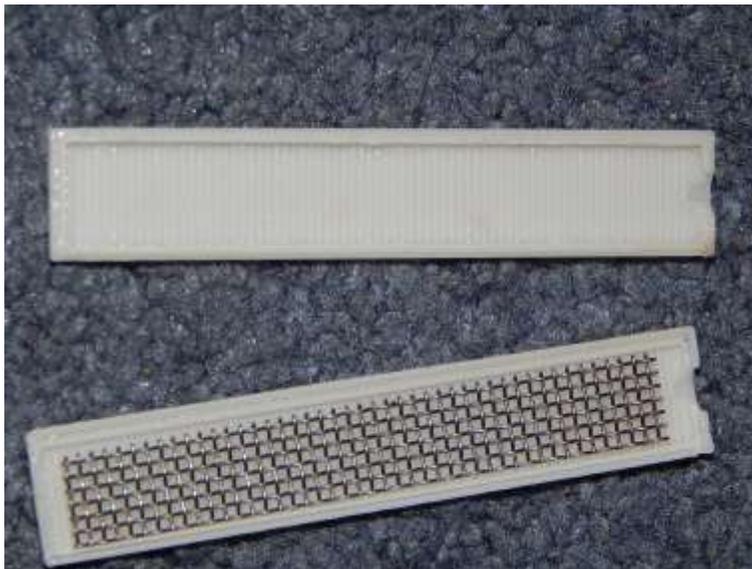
Interlocking 3D printed thin skins showing the opening on the right side for injecting the adhesive by syringe.
